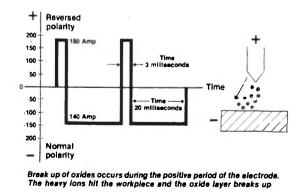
Plasma welding of aluminium : changing polarity
